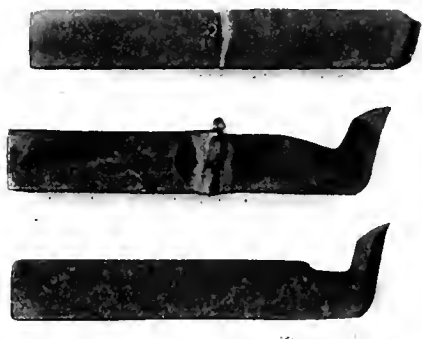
Diamond-point Lathe Tool made with High-speed Steel Cutting End electrically welded to a Mild Steel Shank. Courtesy of the Thompson Electric Welding Co.
